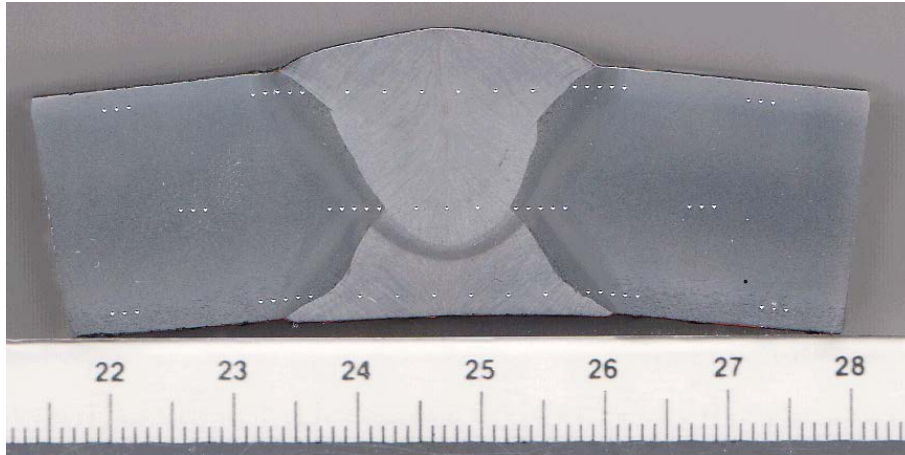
Macrograph of the longitudinal weld in V-X65 with residual imprints from hardness measurements.
